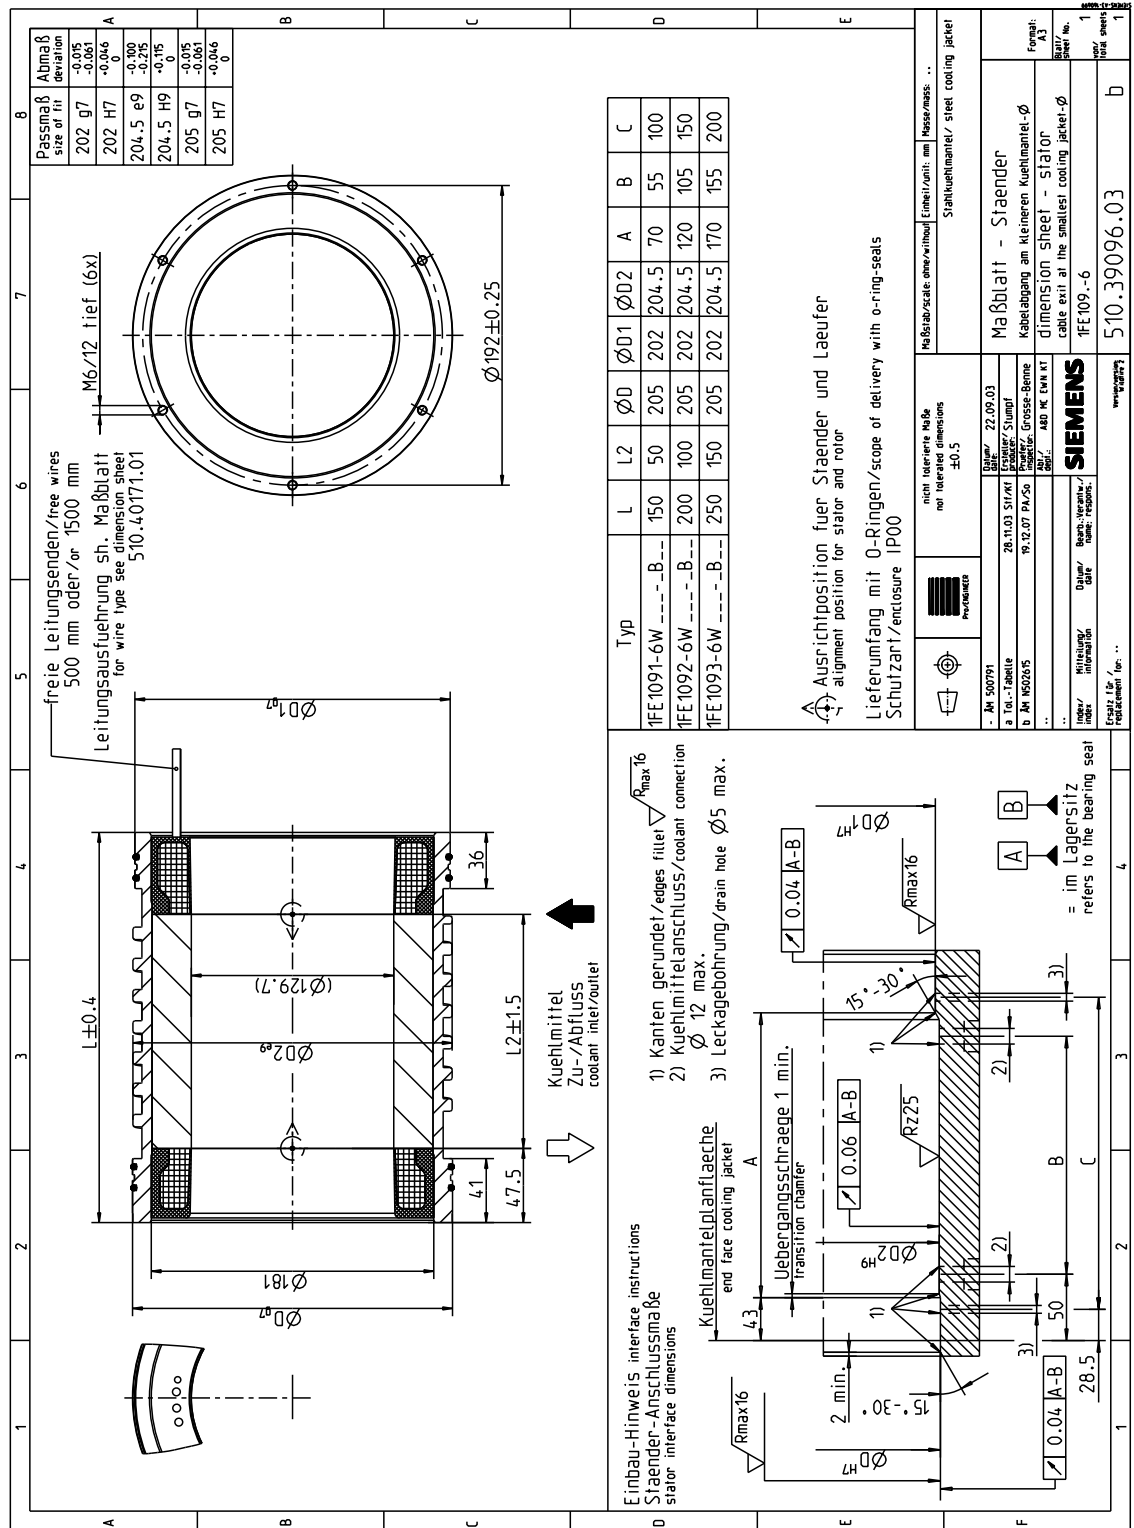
1FE109□-6, stator with cooling jacket, cable outlet at the smaller cooling jacket diameter
